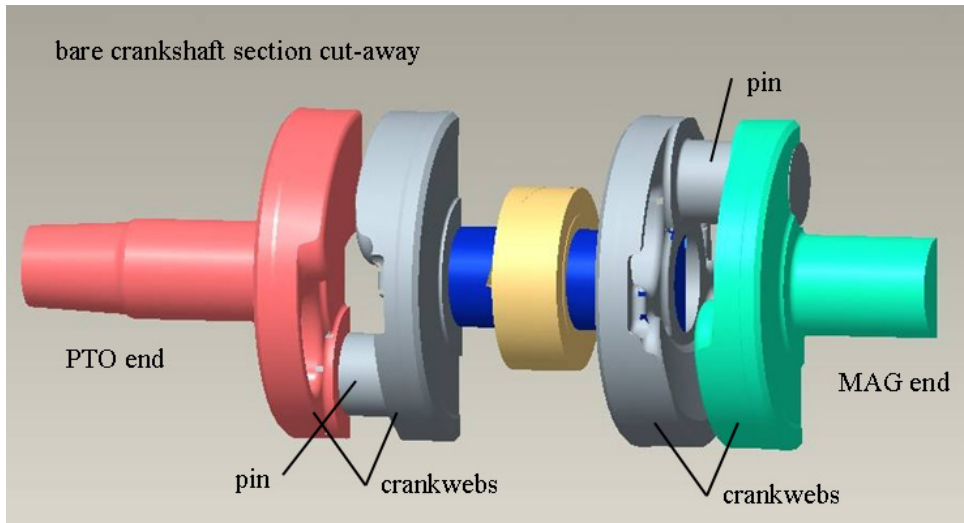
A bare two cylinder crankshaft with sections cut-away.
